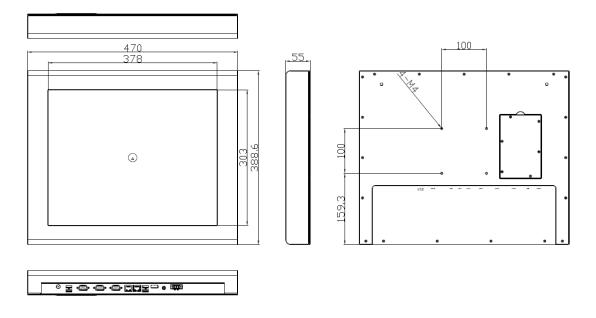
Dimensions of APC-3984A/APC-3985A
